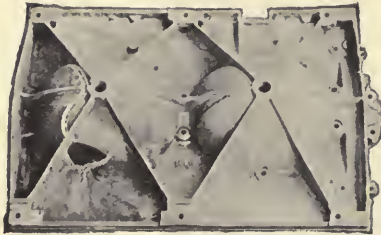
Gear-case bevelled previous to welding.
